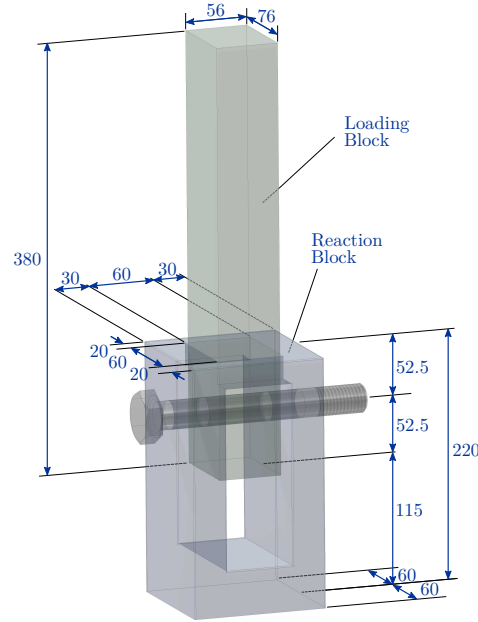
Schematic of bolt double-shear test assembly (dimensions in mm).
